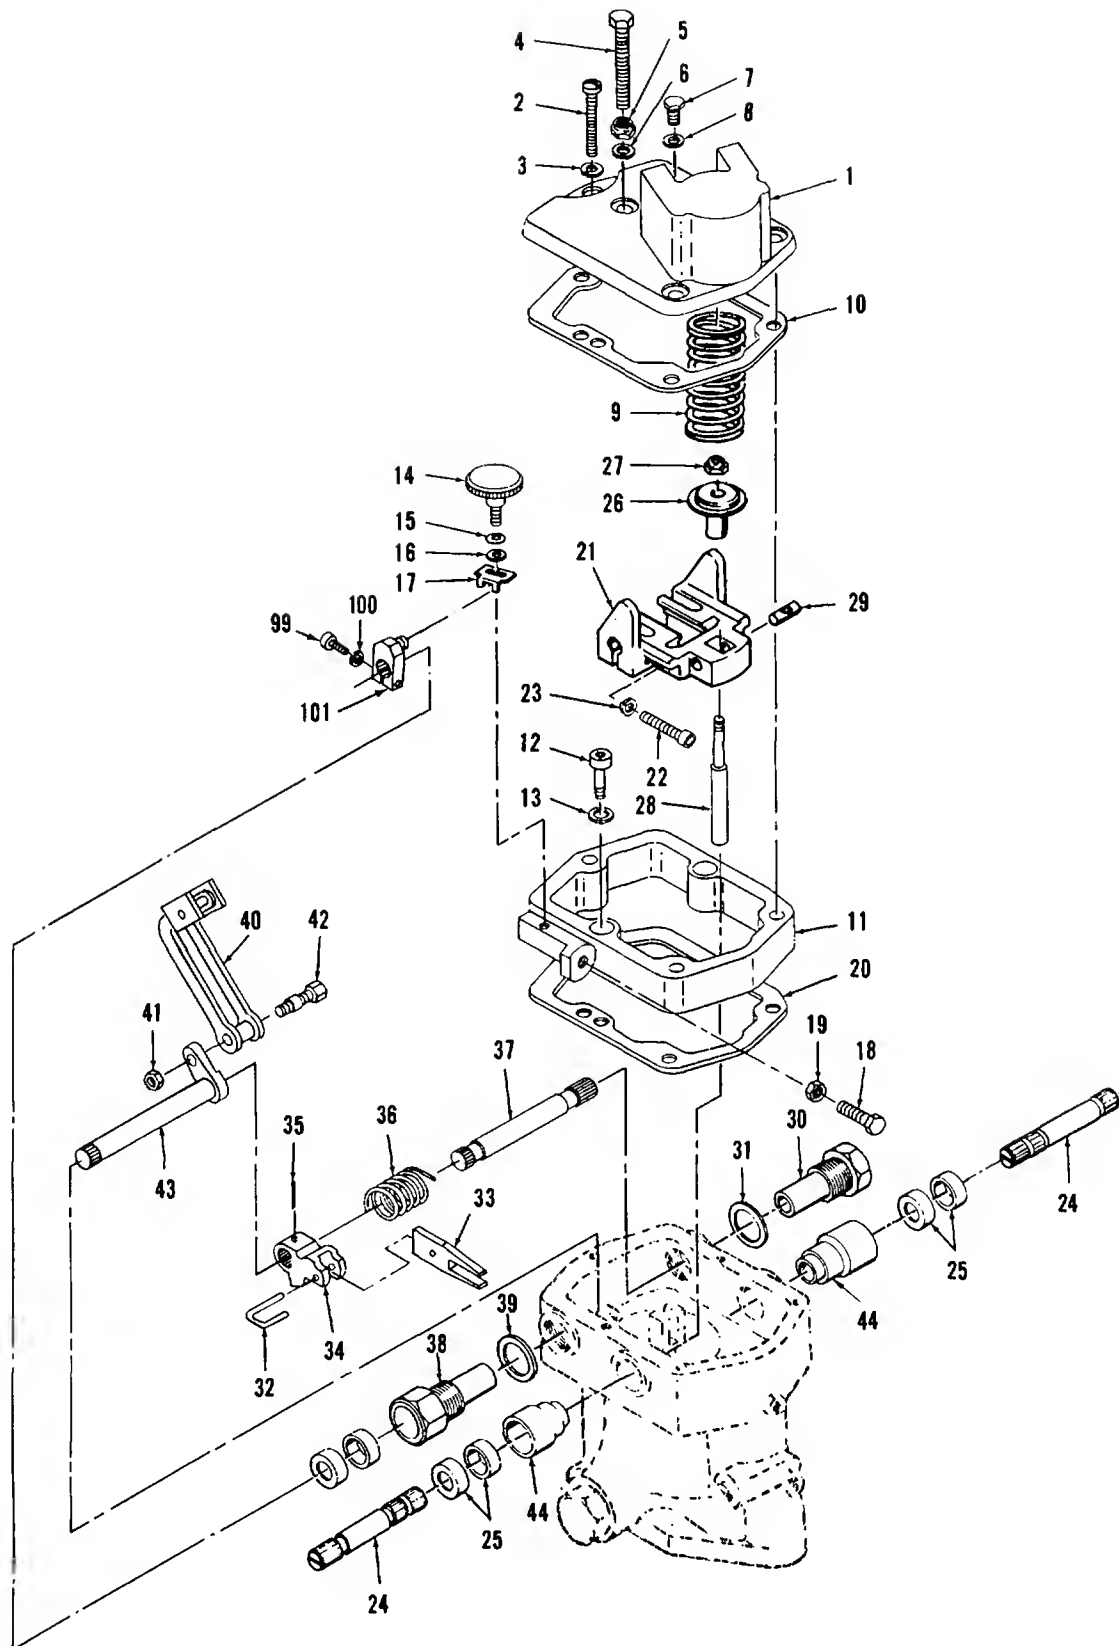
Governor, Exploded View (Sheet 1 of 3)
